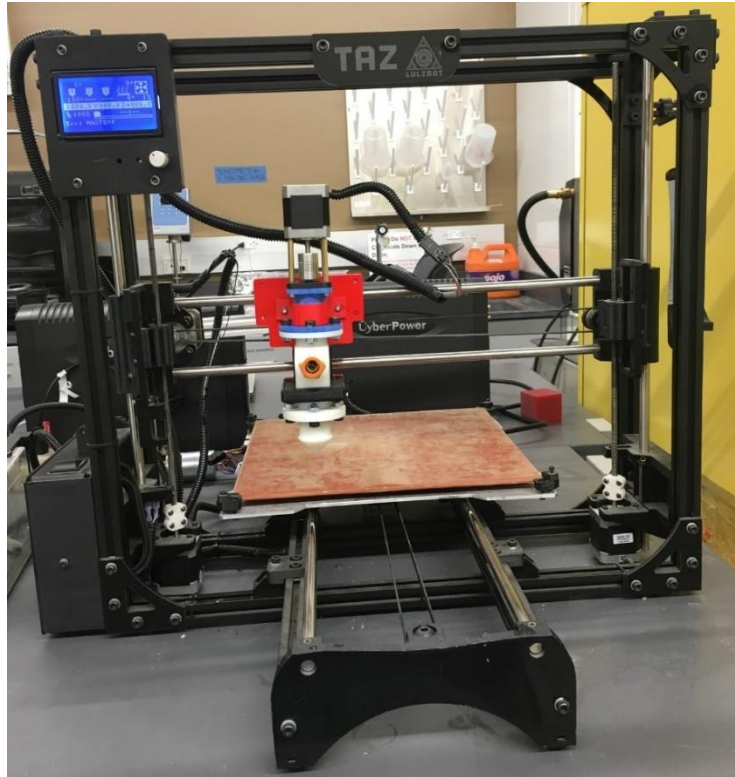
Final Assembly of UHTR Printing 3D Printer
